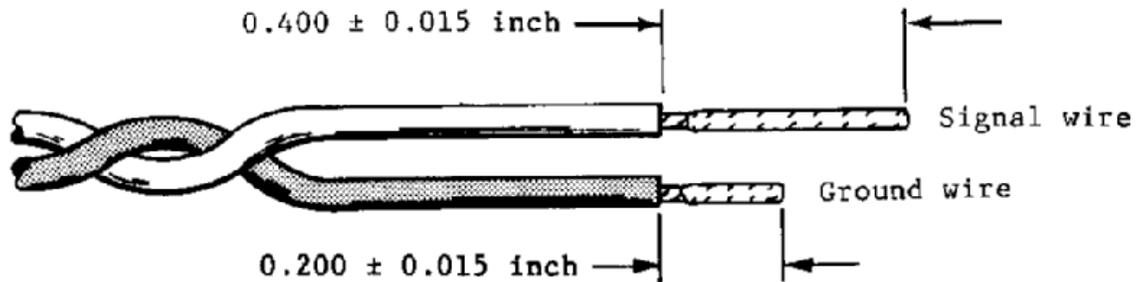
Trimming Dimensions for AWG 24 and 26 Wires
